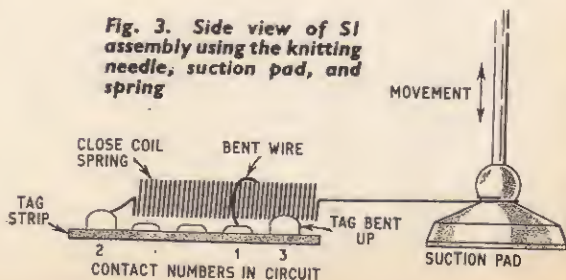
Side view of S1 assembly using the knitting needle, suction pad, and spring
